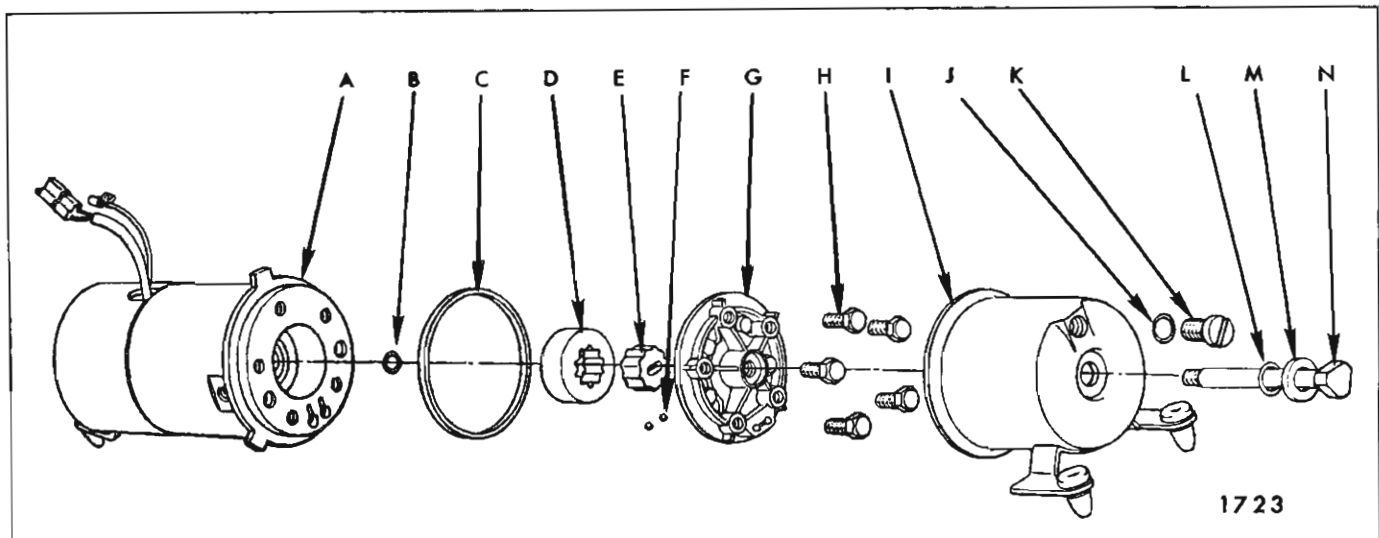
Hydro-Lectric Motor and Pump Disassembled
